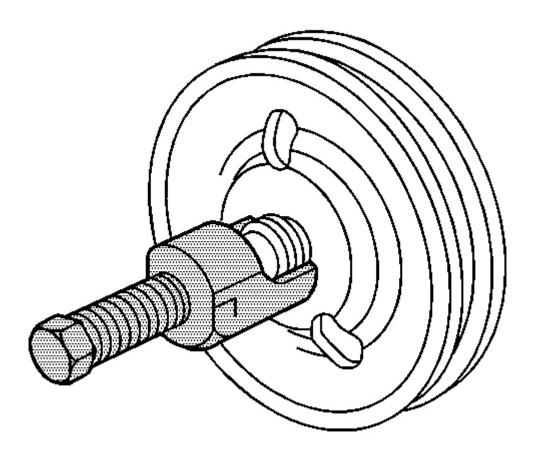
View Of Power Steering Pump Pulley Remover Courtesy of GENERAL MOTORS CORP.
